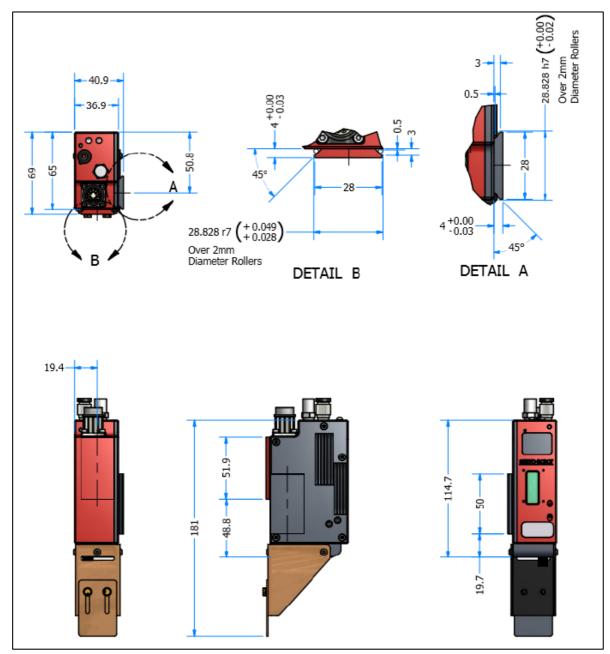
(b) Detailed dimensions (FUJI-CAM 2.0)
